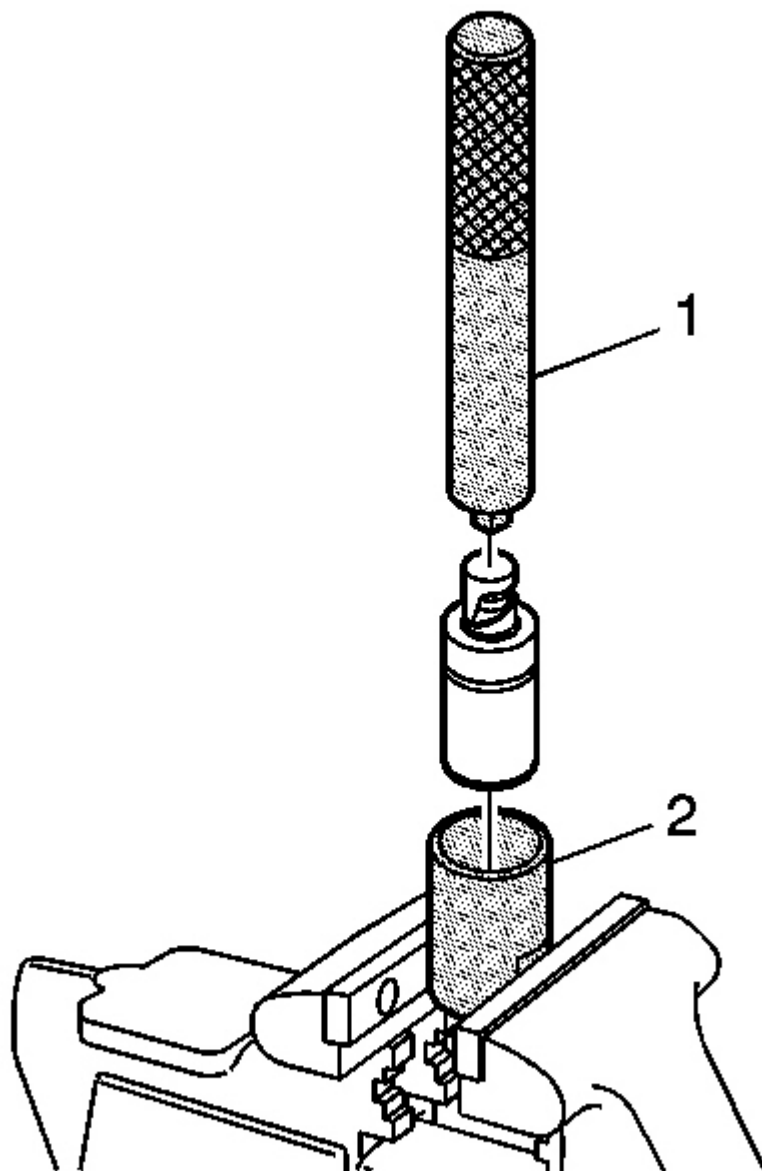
Turn The Ratchet Cylinder Into The Piston Using J 45027-1
